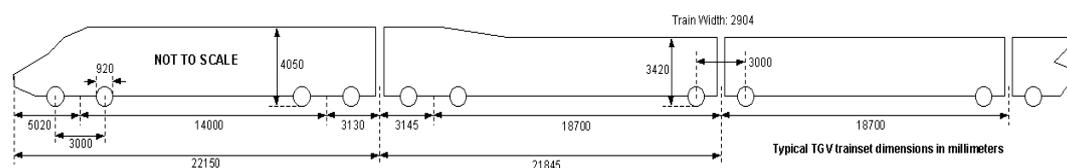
Key dimensions for a typical TGV trainset, in millimeters [4].
